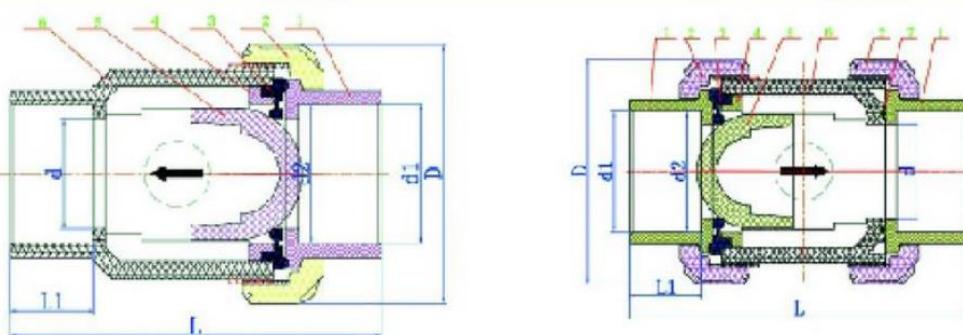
PVC valve ball wafer check valve 2-8 inch
